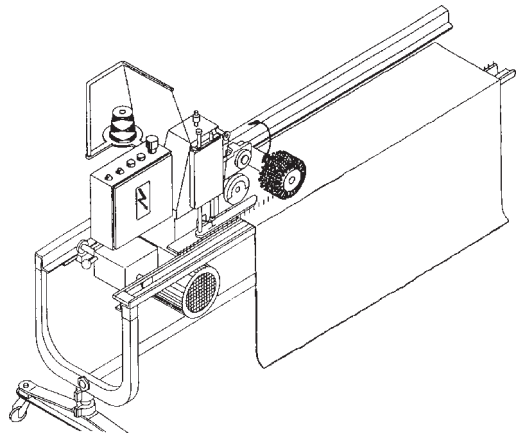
Securing two piece ends in order to sew them together using a carriage-type sewing machine.
